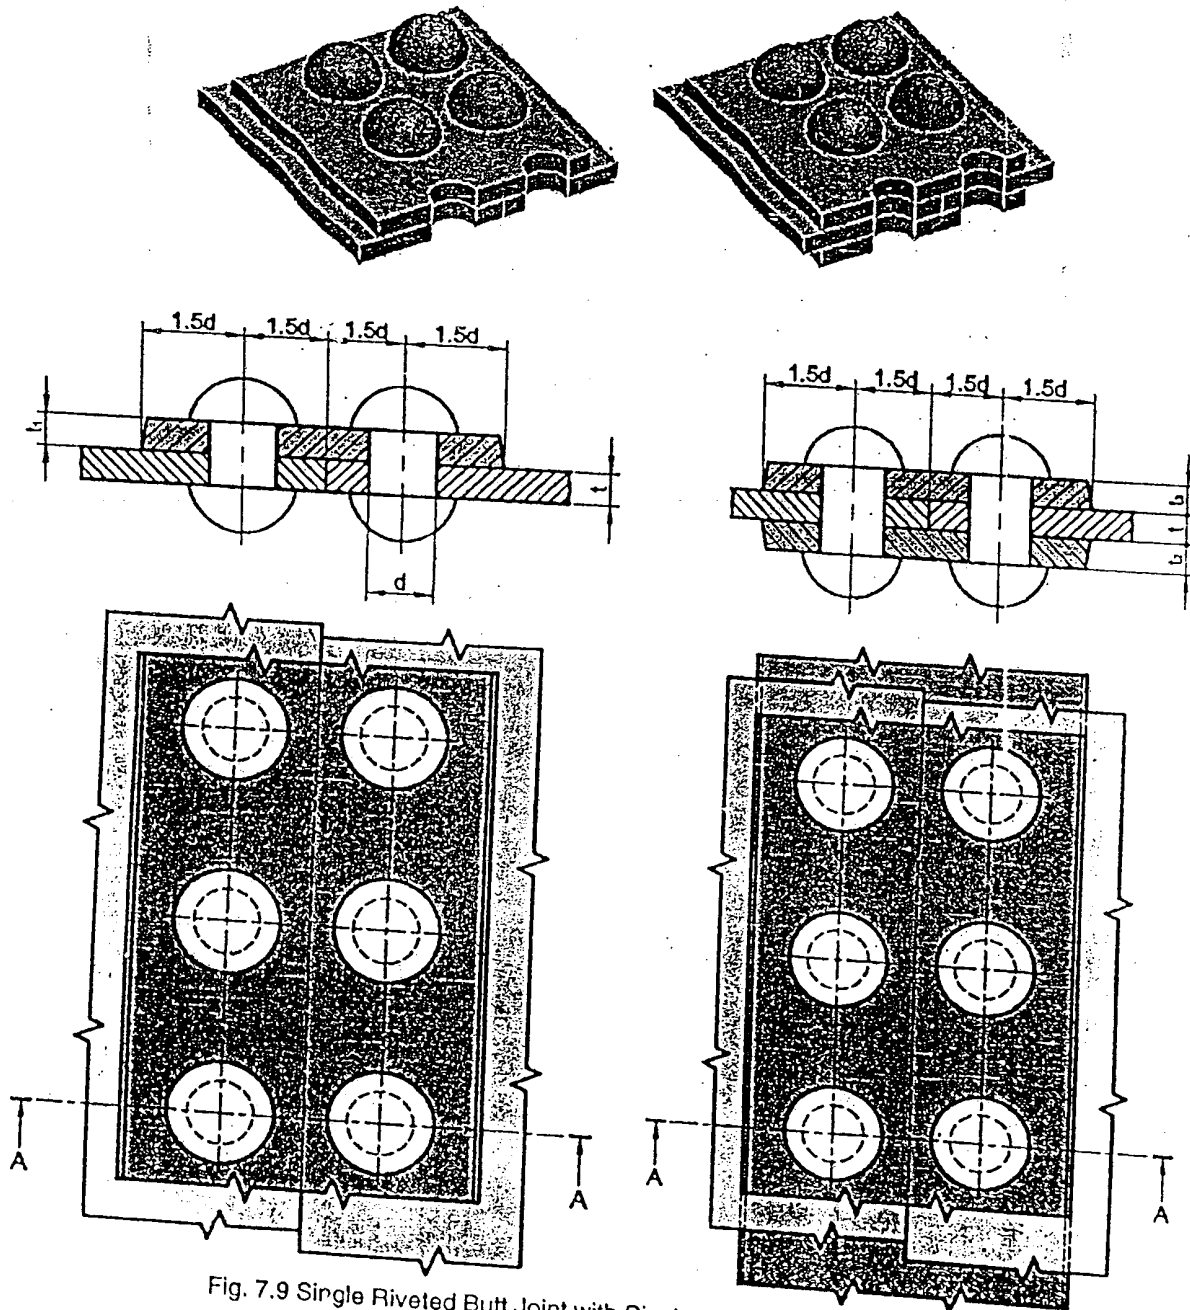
Single Riveted Butt Joint with Single and Double Cover Straps
